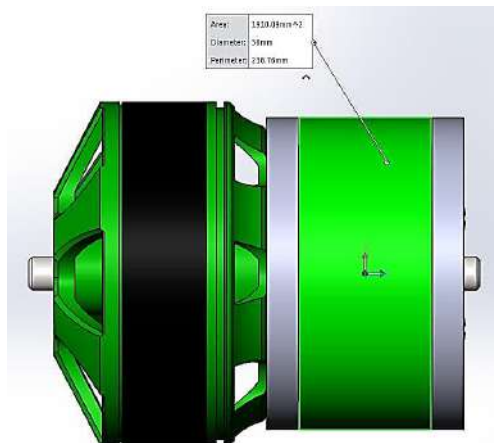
Assembly drawing plan of the BLDC electrical motor and very compact cycloidal reducer developed by authors
